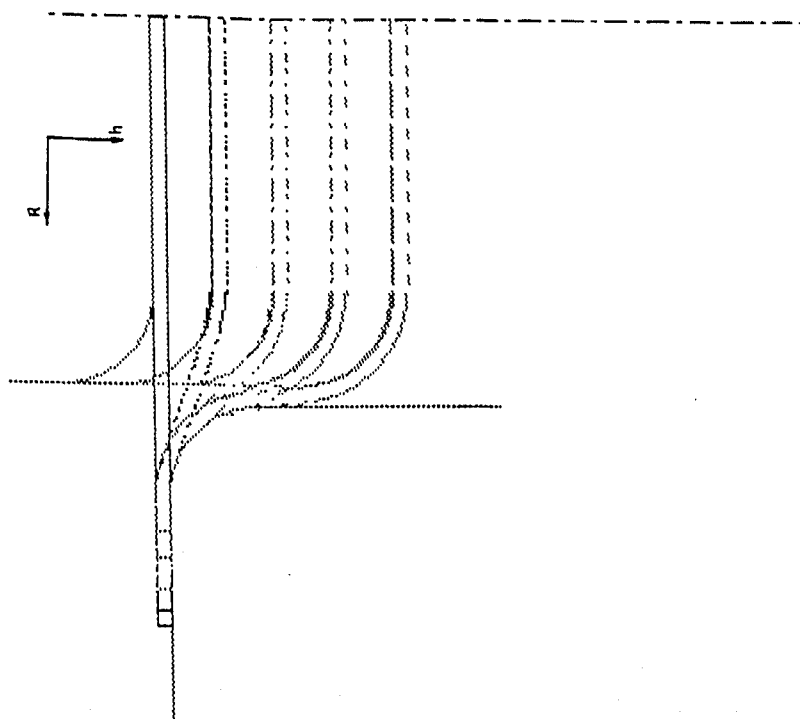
(b) Desired and obtained part drawings for the component in Example Part 2
